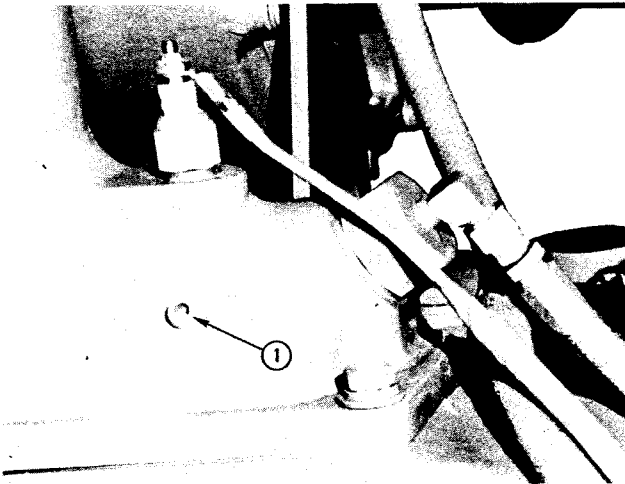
, (N11949). Glow plug inspection hole — N/NT-885 Engine
